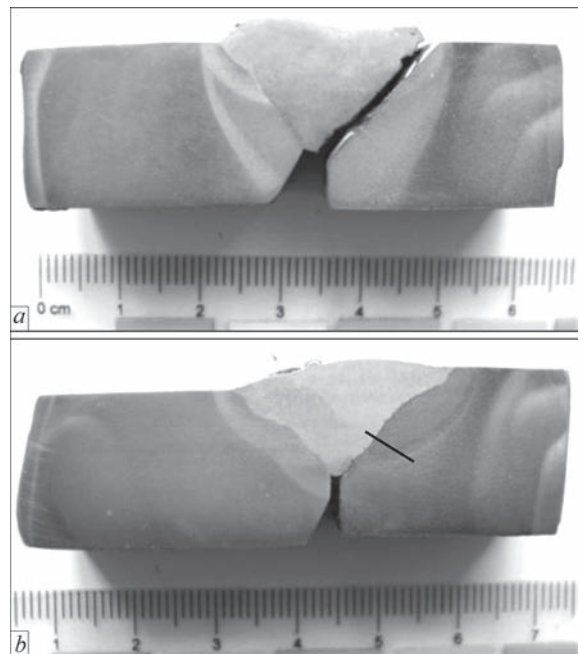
Cold cracks in welded joints of armour steel of grade 71 in welding by Sv-10GSMT wire: *a* — welding without preheating; *b* — $T_{pr} = 150\text{ }^{\circ}\text{C}$
